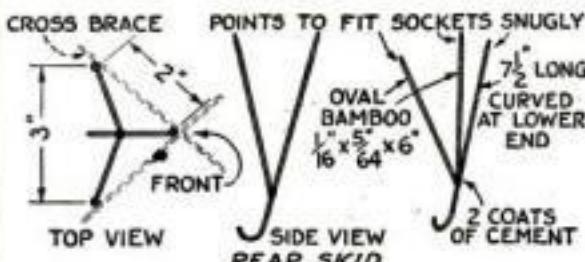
Top and side views of the rear skid and an explanatory sketch drawn in perspective.
